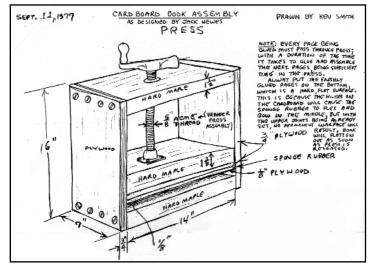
A cardboard book press assembly, designed by Jack Hewes and adapted from a drawing by Ken Smith. Ken Smith Archives.
